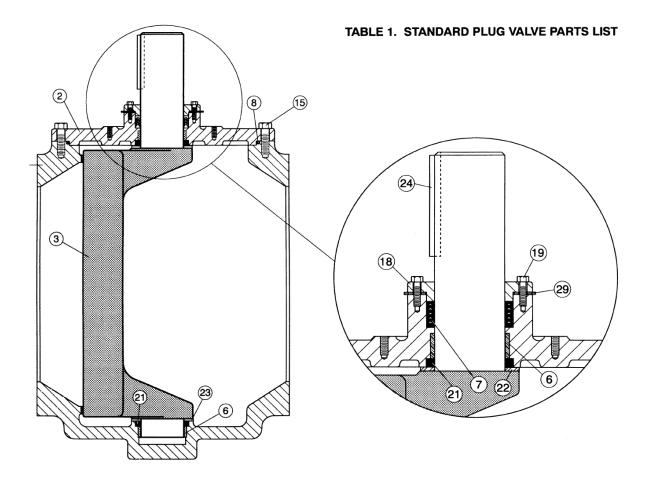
STANDARD PLUG VALVE CONSTRUCTION
